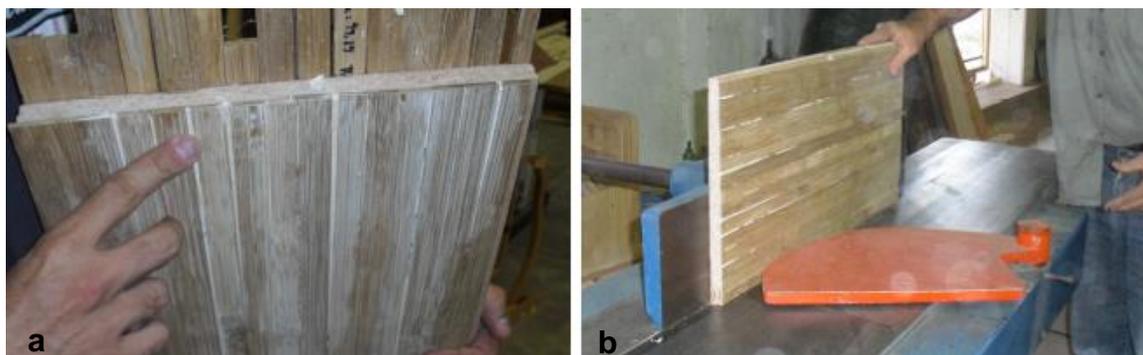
Manufacturing of the MDP (a) reinforced with bamboo and (b) the machining for finishing
